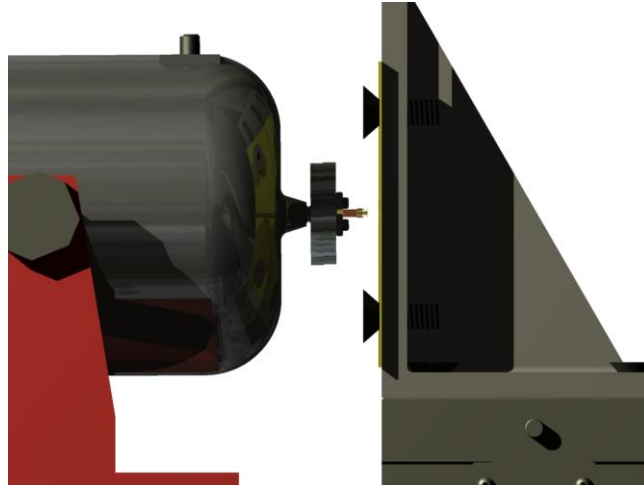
Side View Rendering of Assembled Unmated Experimental Setup
